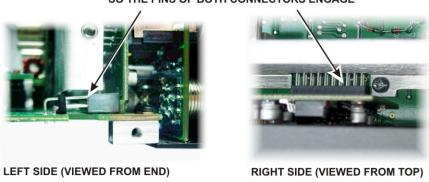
Mounting Front Panel Assembly - Mating P50 and P51.
